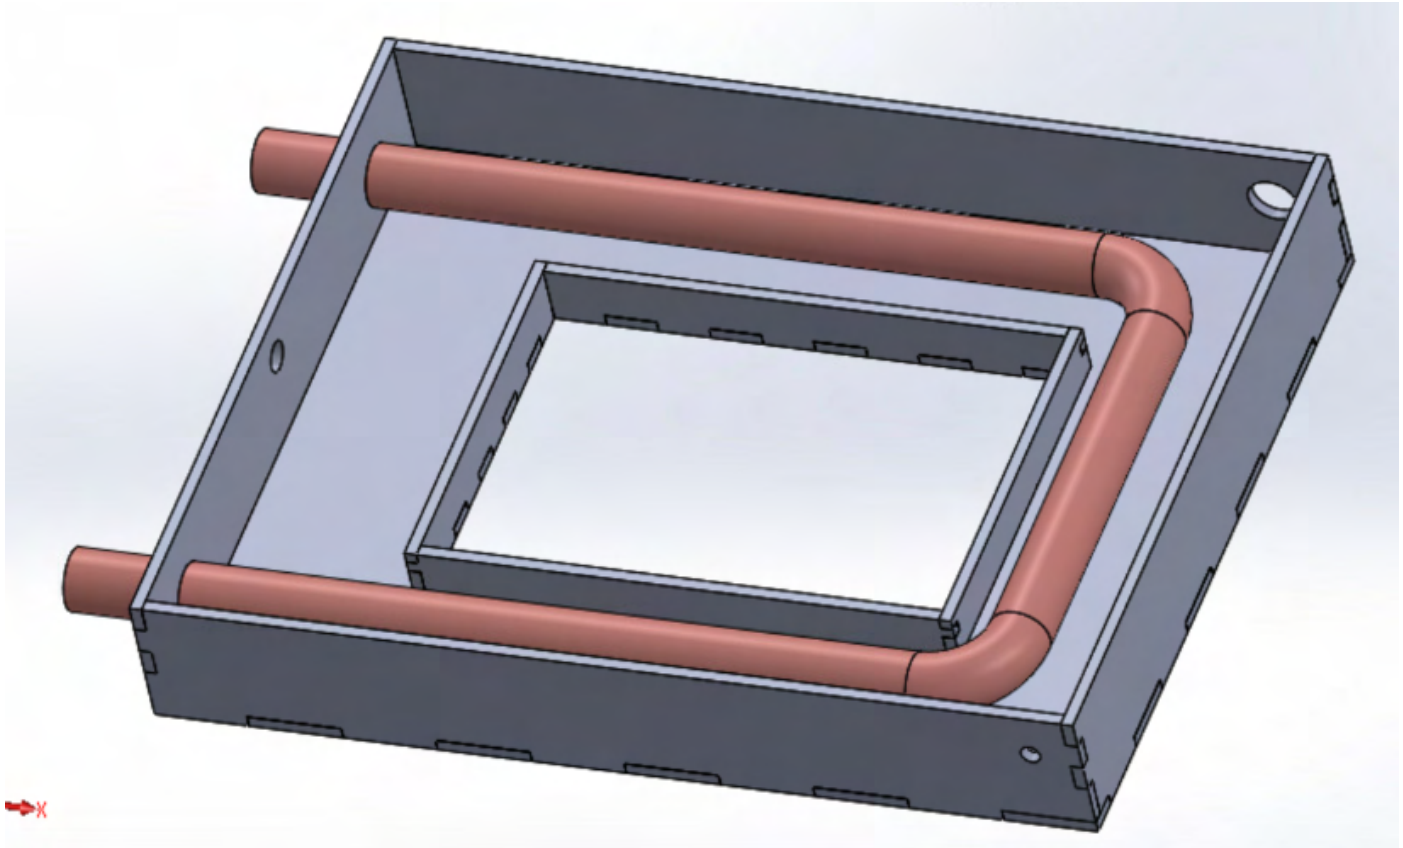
SOLIDWORKS drawing without the lid on the updated assembly.
